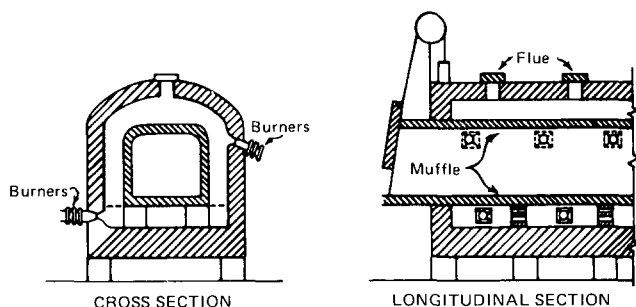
Example of Muffle-Type, Internal-Fired, Multiburner Furnace.
